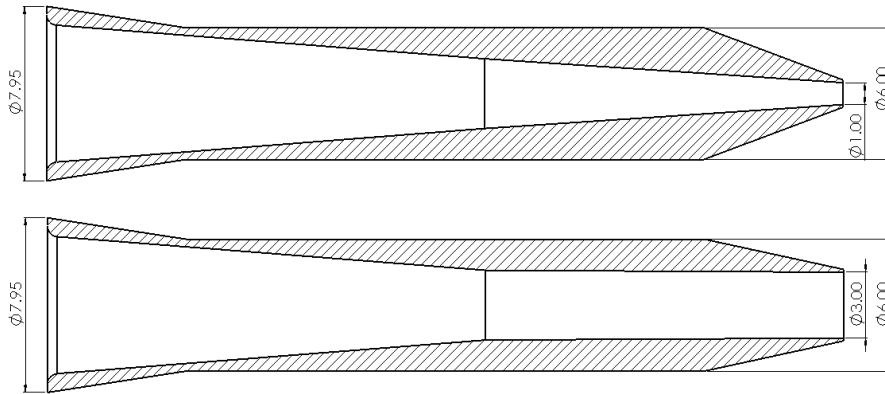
1 mm nozzle cross section on top and 3 mm nozzle cross section on bottom.
